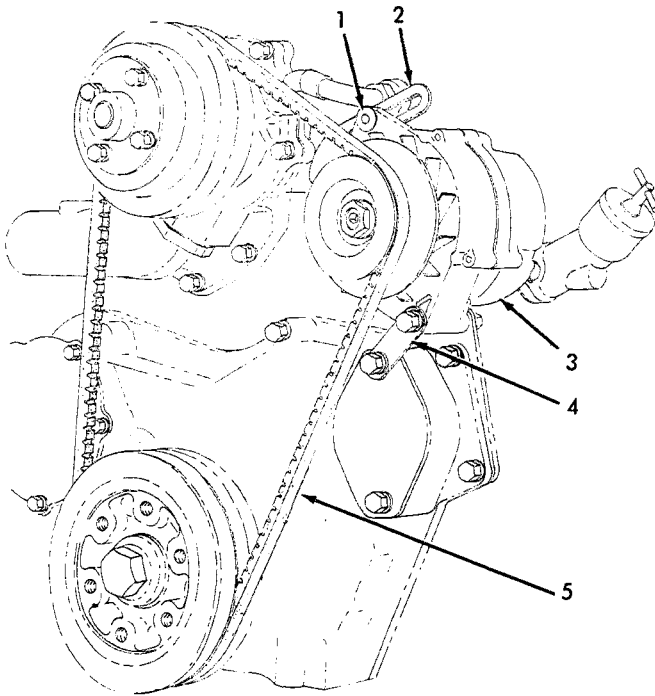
FAN BELT ADJUSTMENT LOCATION
